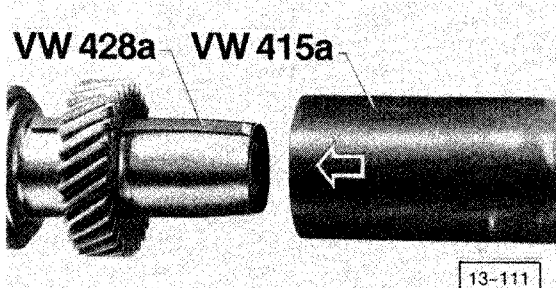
Distributor drive gear/crankshaft timing gear, installing
